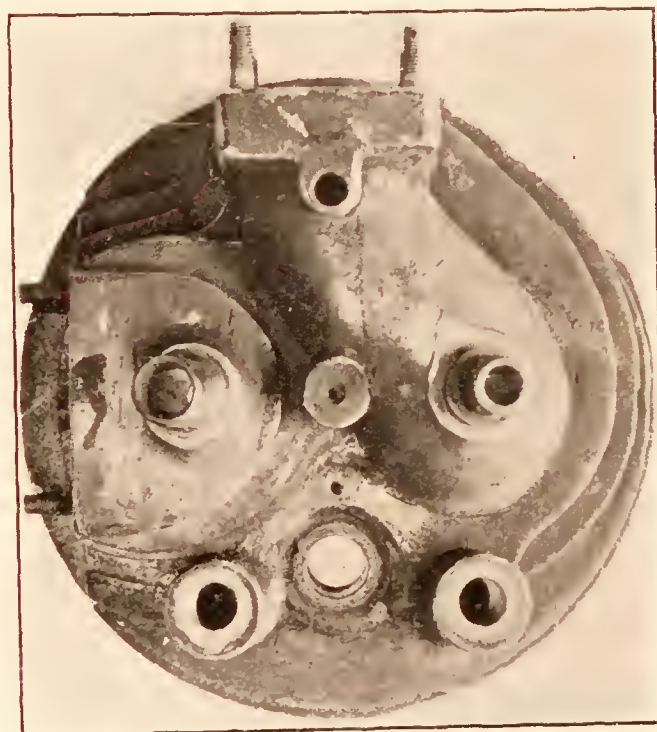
Top view of cylinder head, showing location of hole for thermocouple plug between spark plug and center of cylinder
